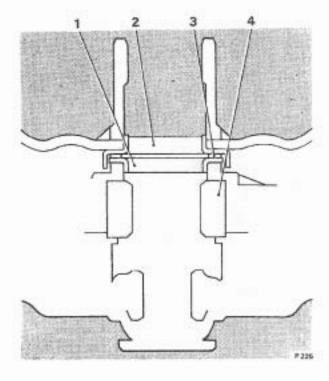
TORQUE CONVERTER – INTERNAL BEARING ARRANGEMENTS
